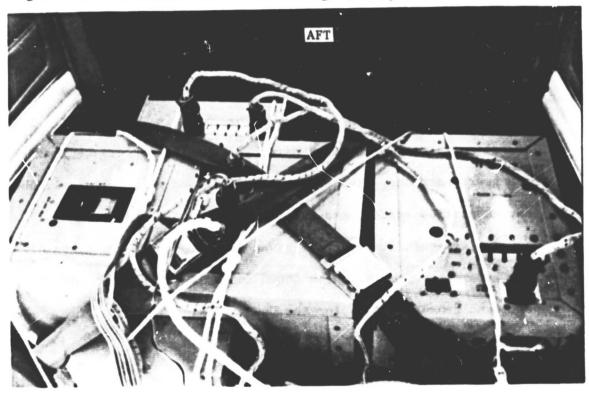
Installed Battery and Computer Modules (Oblique View)
